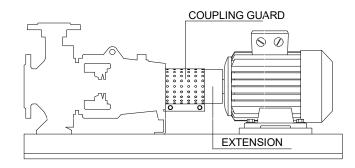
CHECKING ALIGNMENT ON BASE MOUNTED PUMP DESIGN
